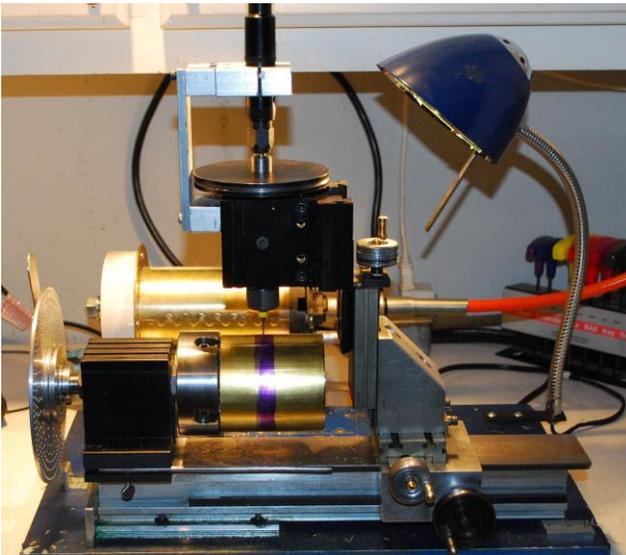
Drilling the holes for the flange screws. A collet is used to hold the drill bits due to limited clearance of the milling head. Note the barrel is almost as large as the lathe chuck.
